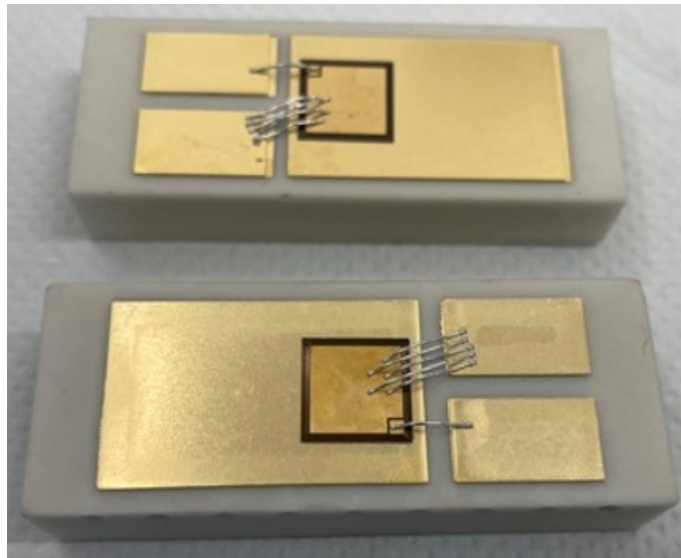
The sintered IGBTs on AlN coolers and wirebonding
